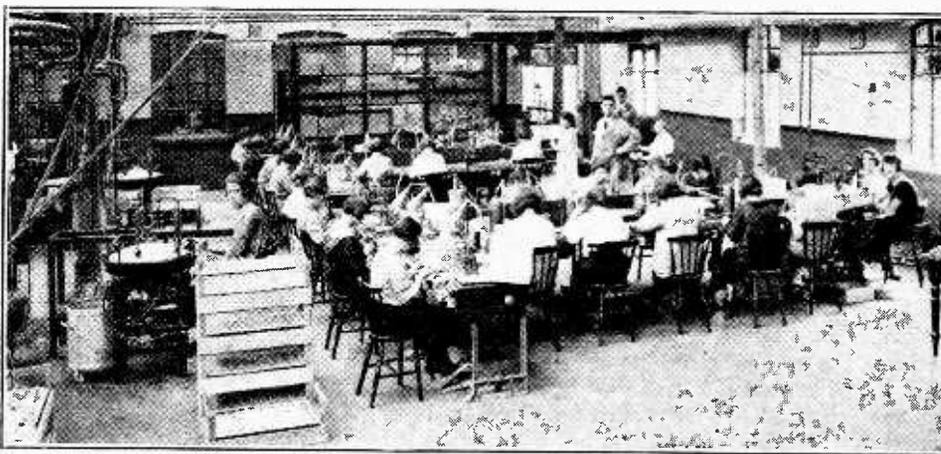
A corner of the Assembly Room at Burndep's valve factory
